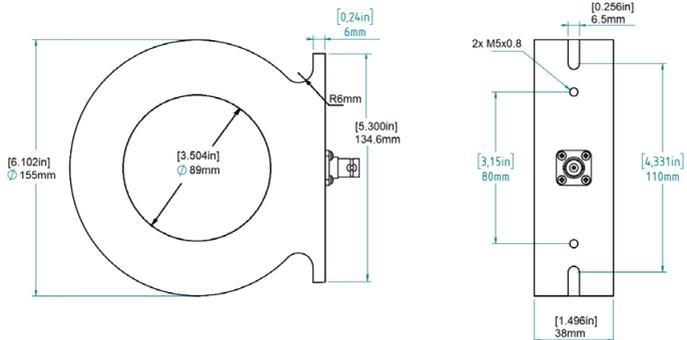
PMK LILCO®-Series 89 Mechanical Dimensions
